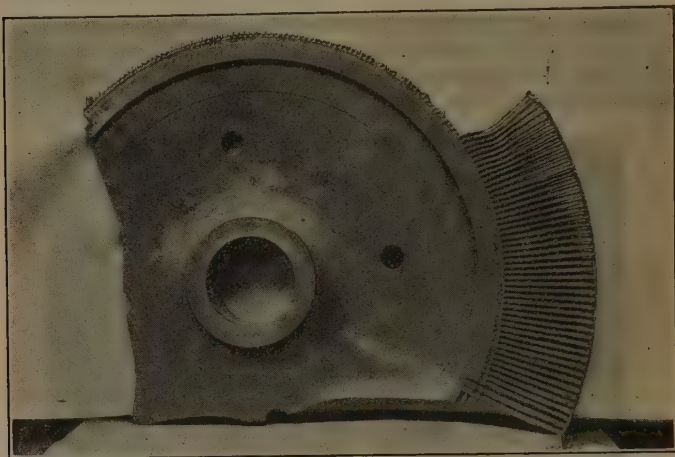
TURBINE WHEEL FAILURE AS A RESULT OF FATIGUE BENDING.
